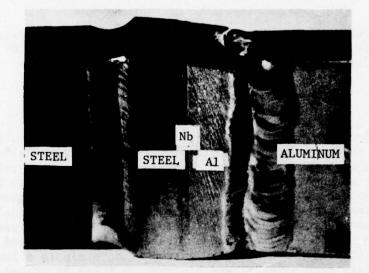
Dissimilar Metal Joint Produced Using a Bi-Metal Transition Strip with a Niobium Interface.
